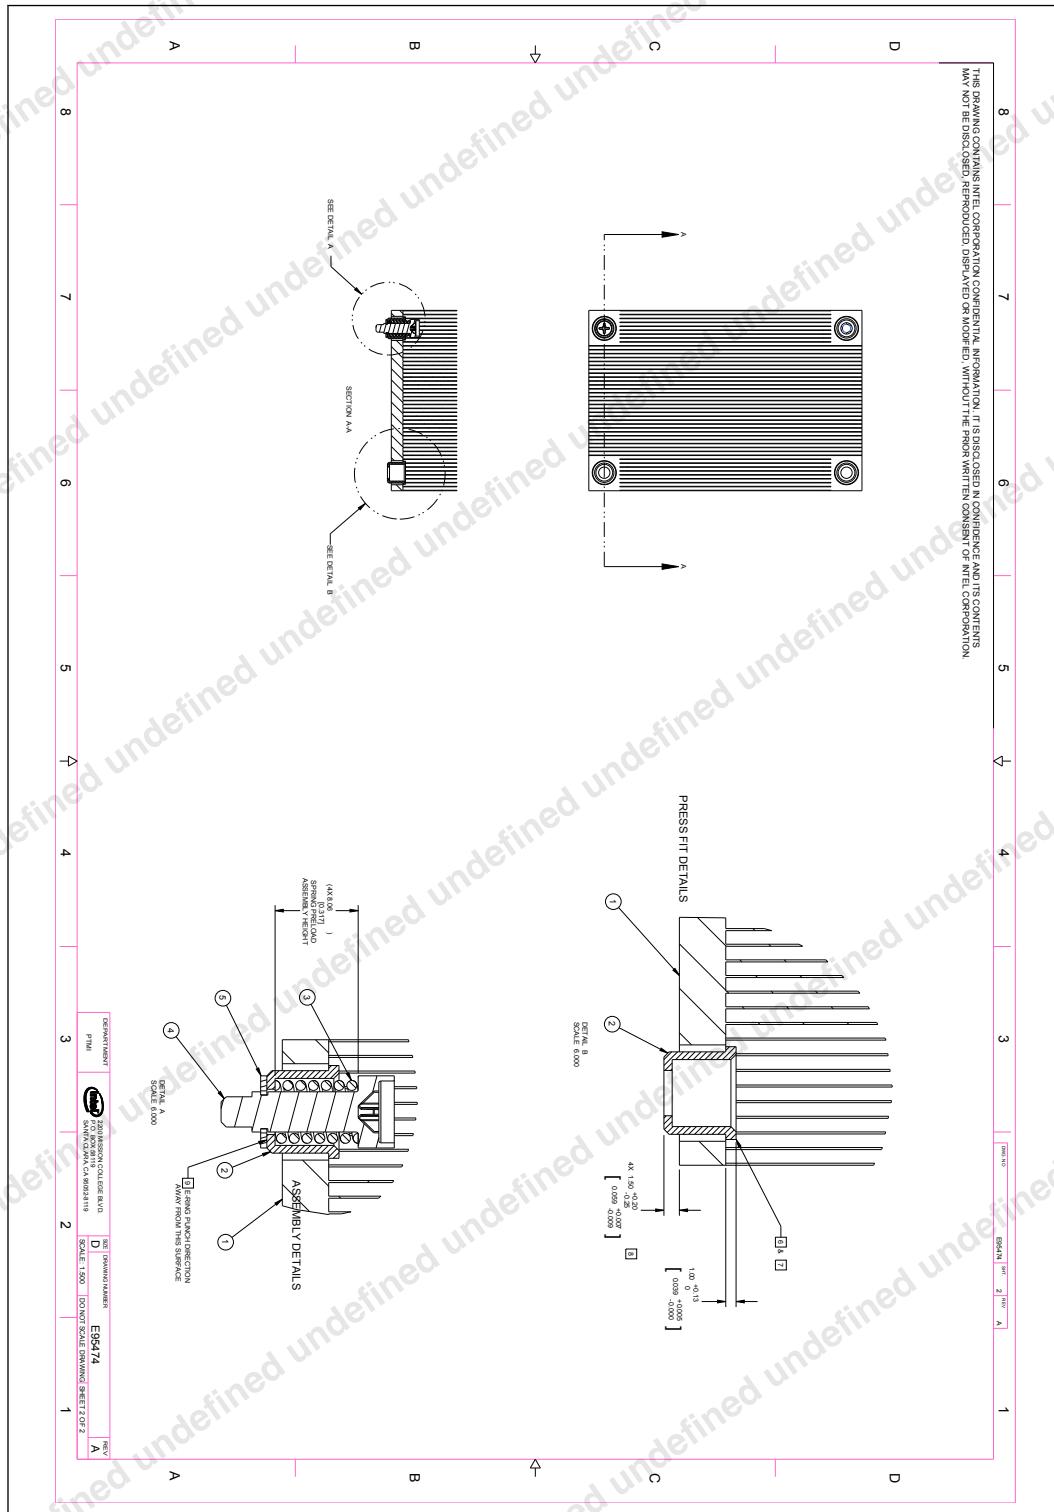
1U Narrow Heat Sink Assembly (Page 1)
